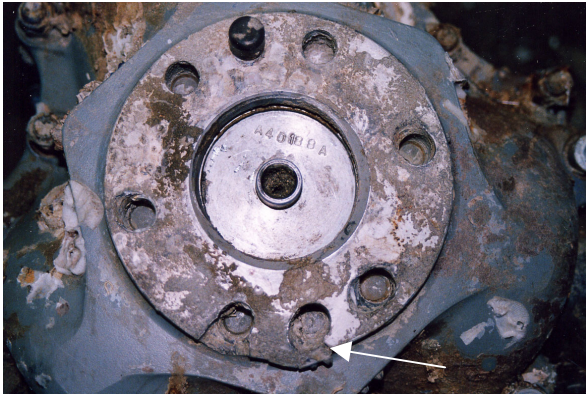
Propeller hub mounting face (after cleaning), showing lateral distortion of the mounting bolt holes.
